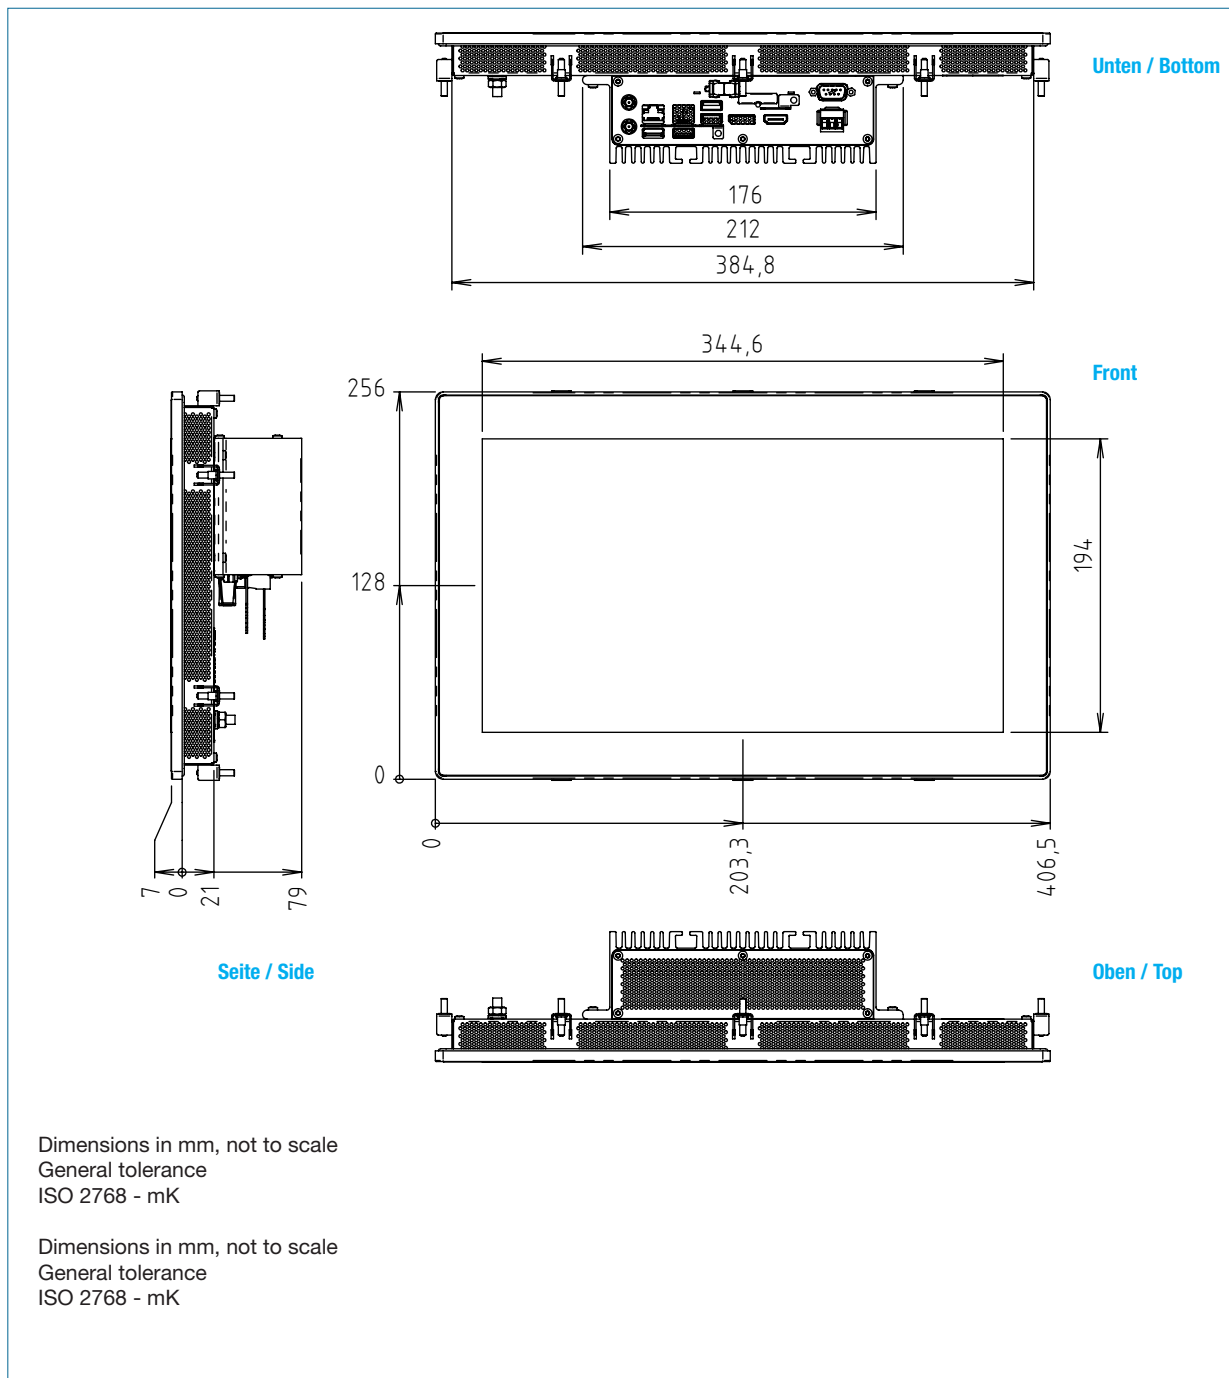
15.6" Prime Panel Pico Installation - device dimensions
